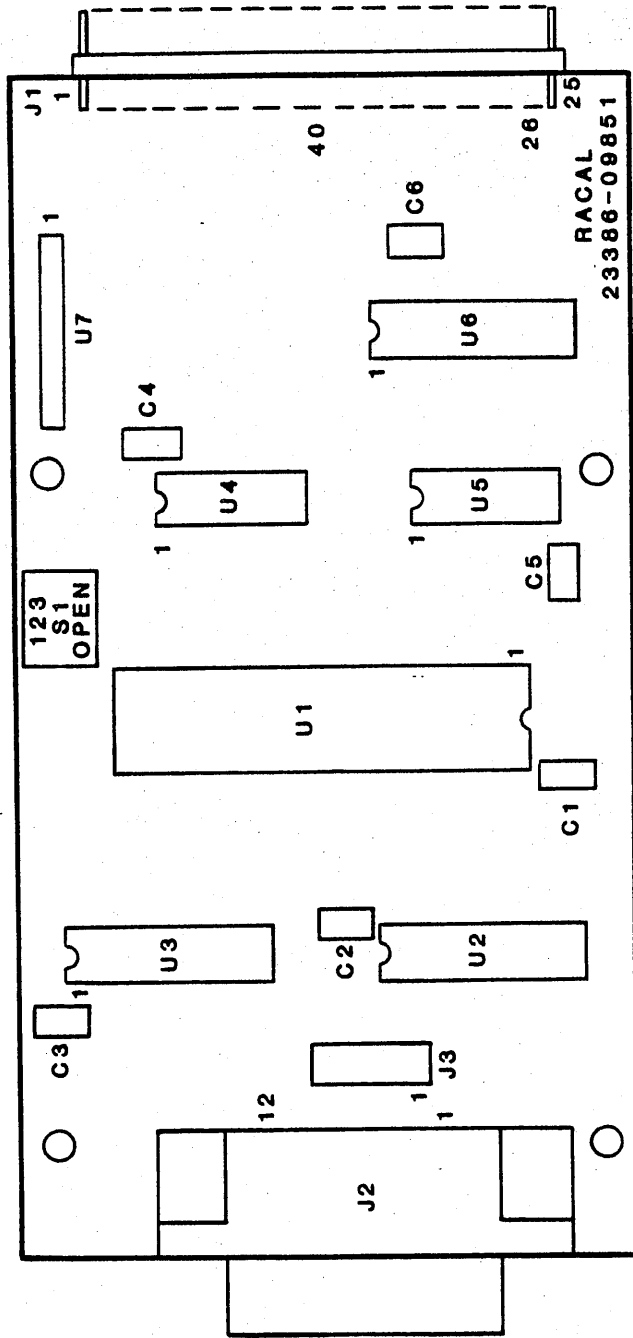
A. Z80 GPI Interface Circuit Card Assembly (A6A1)
